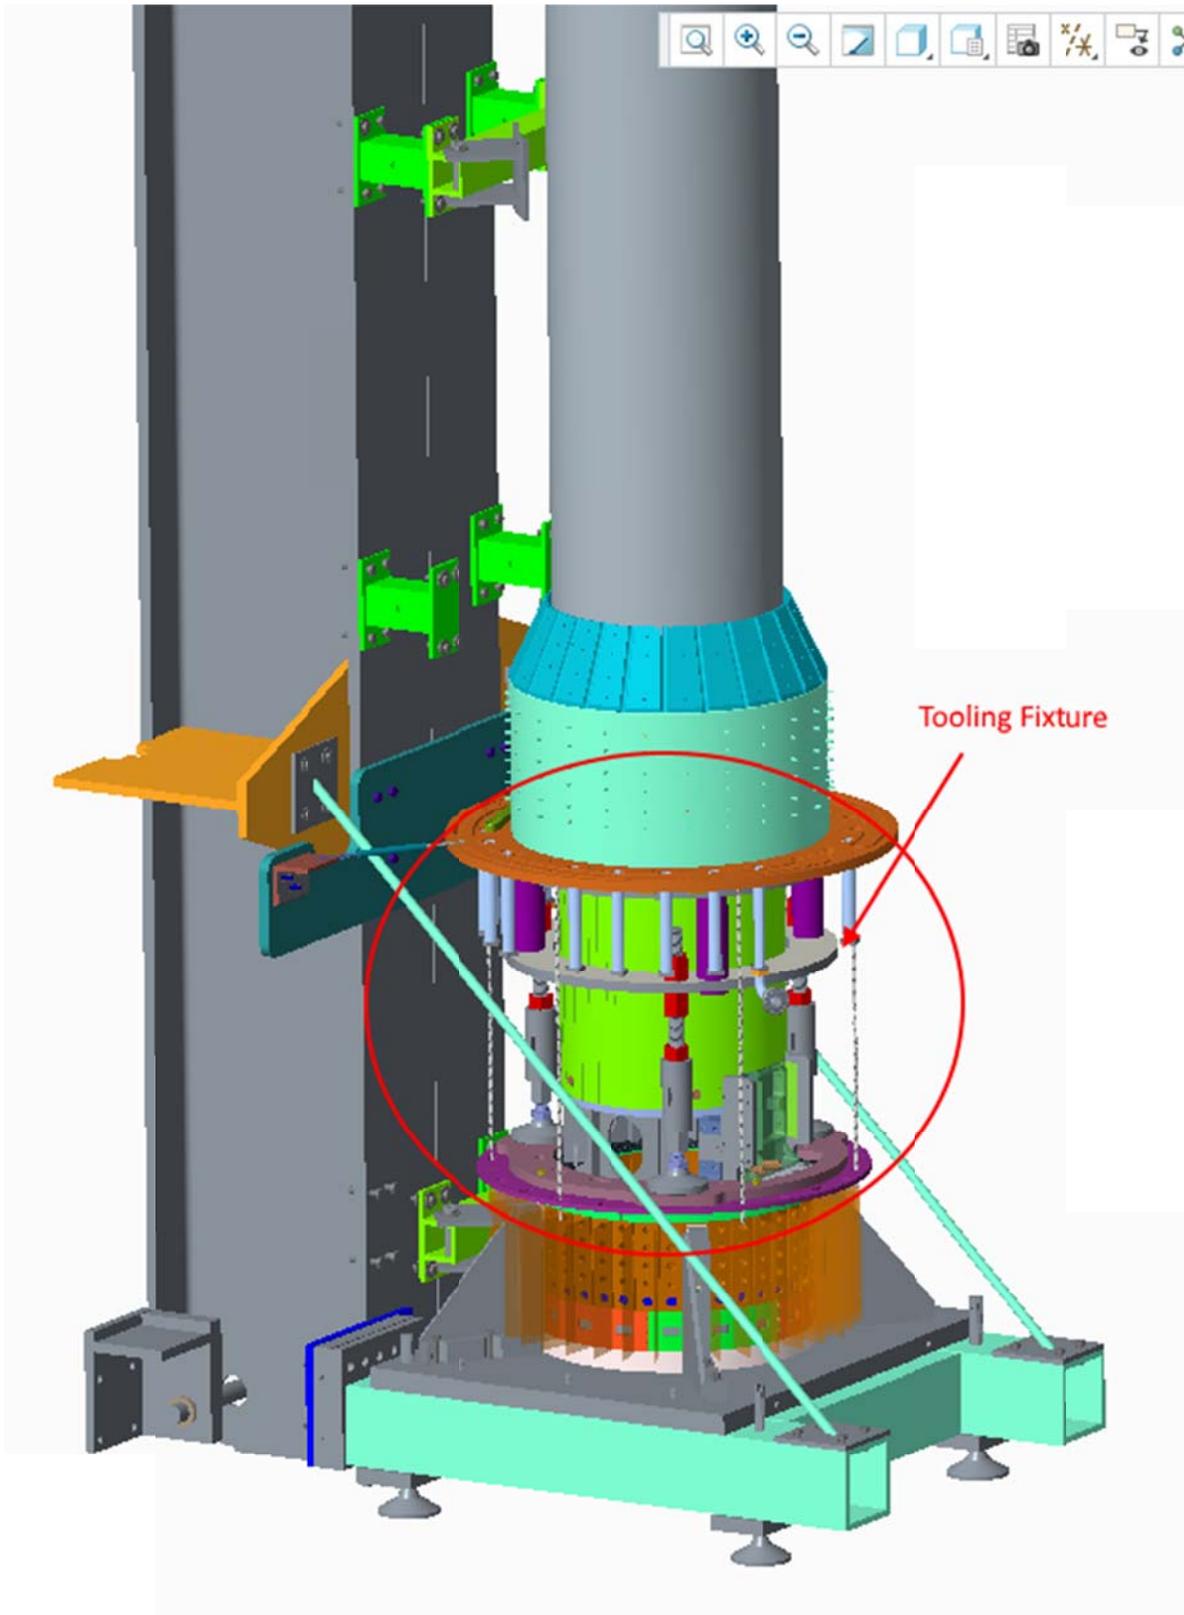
Tooling Fixture shown assembled on TF/OH Bundle and supporting CS Casing
